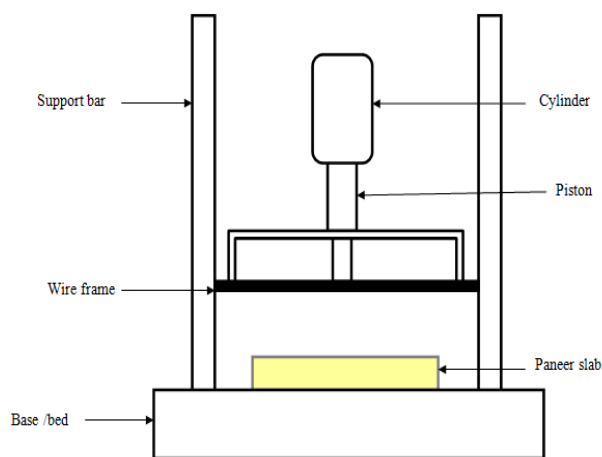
Schematic diagram of pneumatic paneer cutting machine
